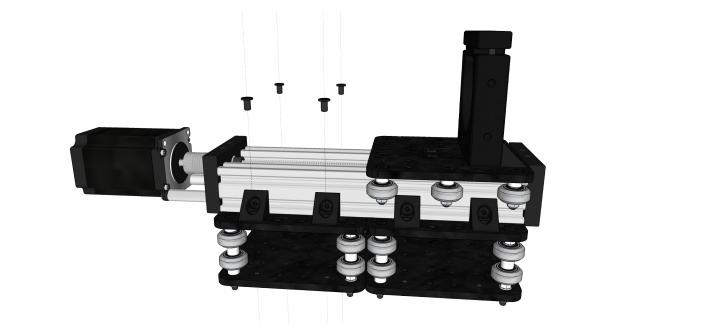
Assemble the Z Axis Actuator: Install the Stepper Motor
